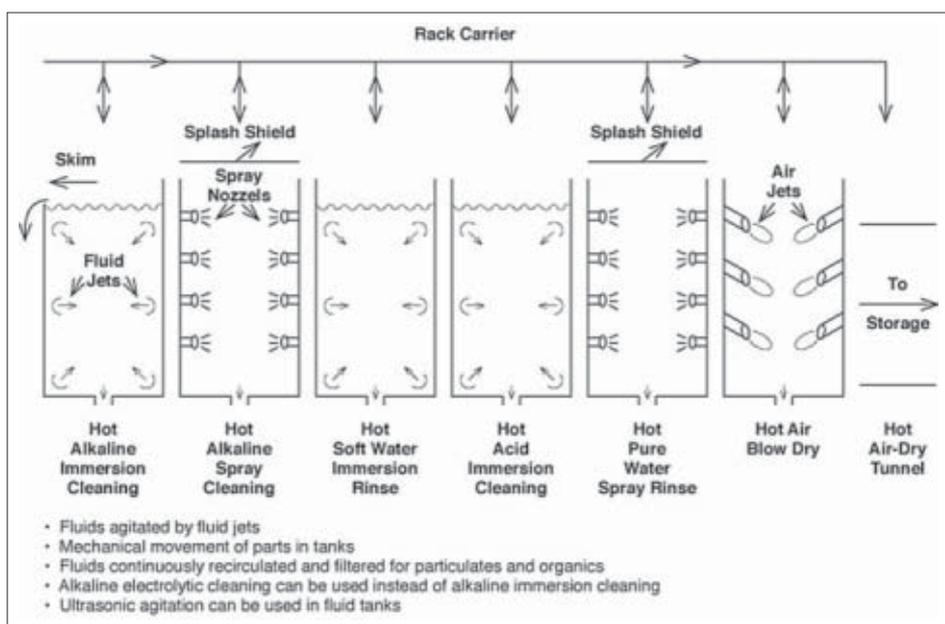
Typical tank-type cleaning line for parts mounted on a rack.
